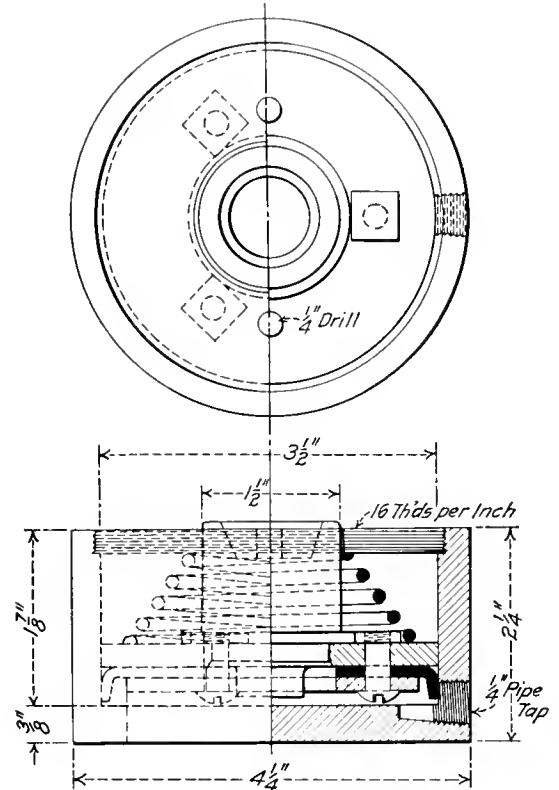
Pneumatic Holder-on Used for Driving Rivets.
